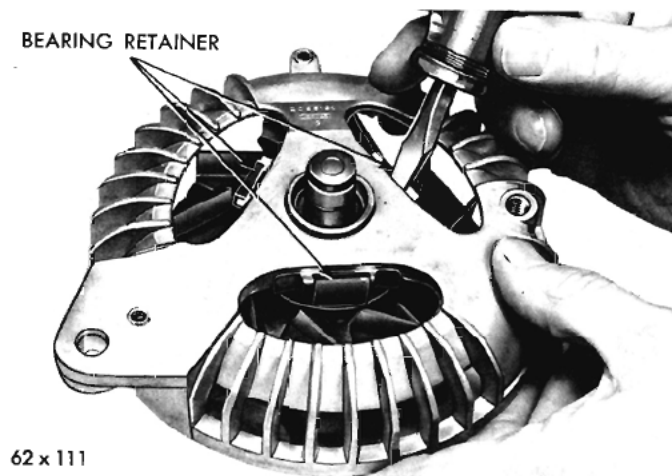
Disengaging the Bearing Retainer from the End Shield
